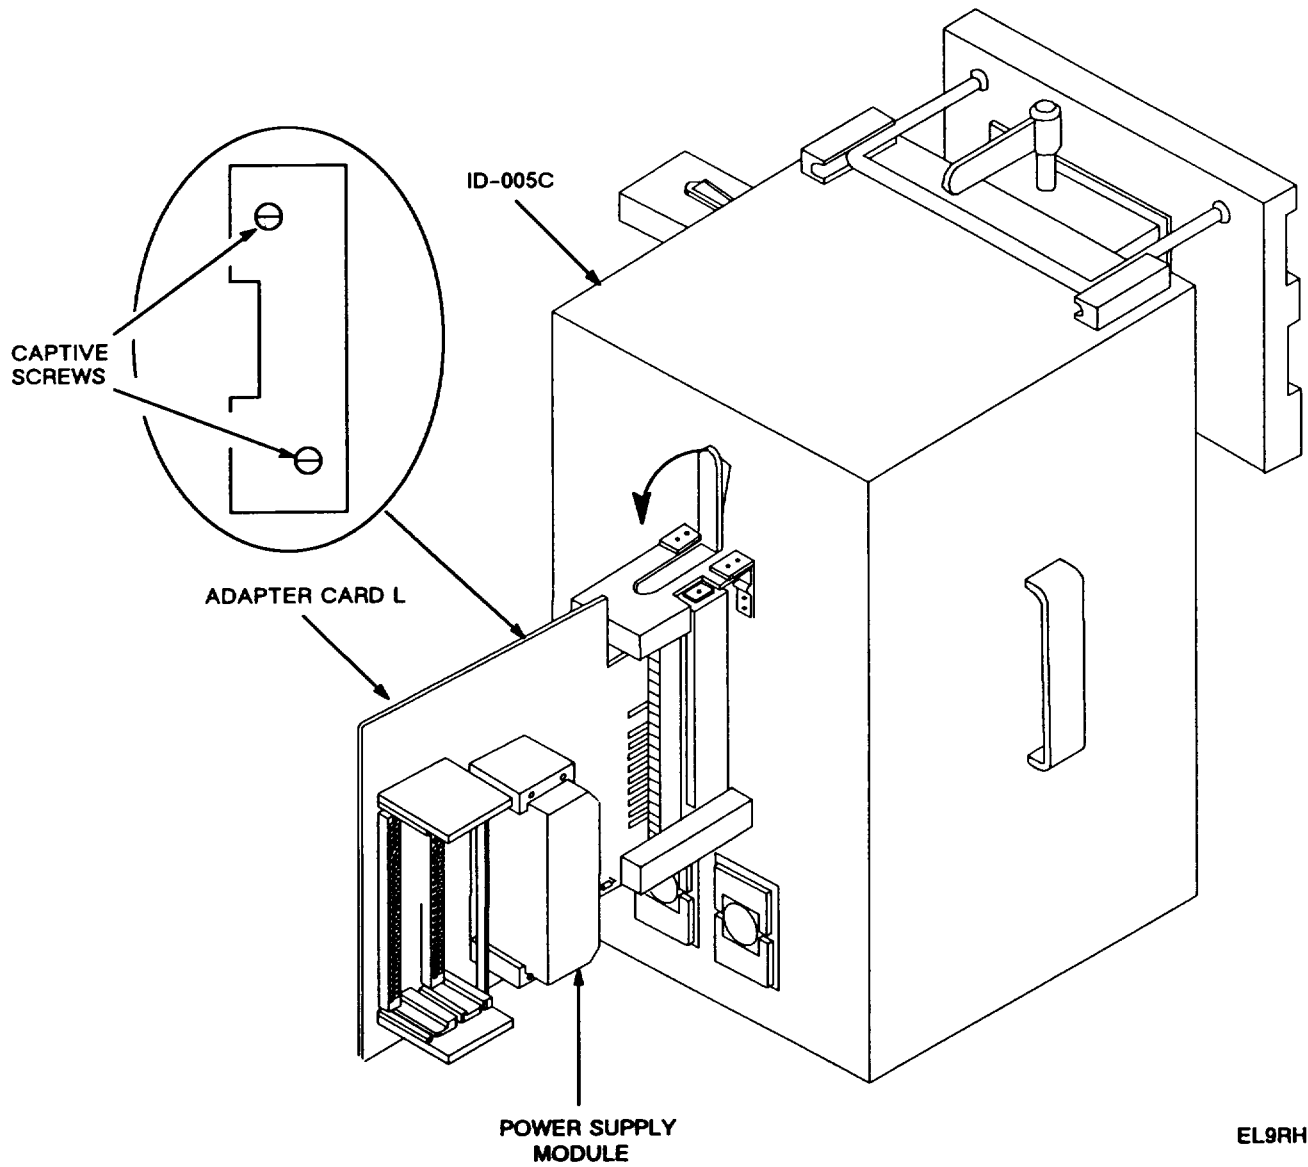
Installation of Power Supply Module Assembly on Adapter Card L
